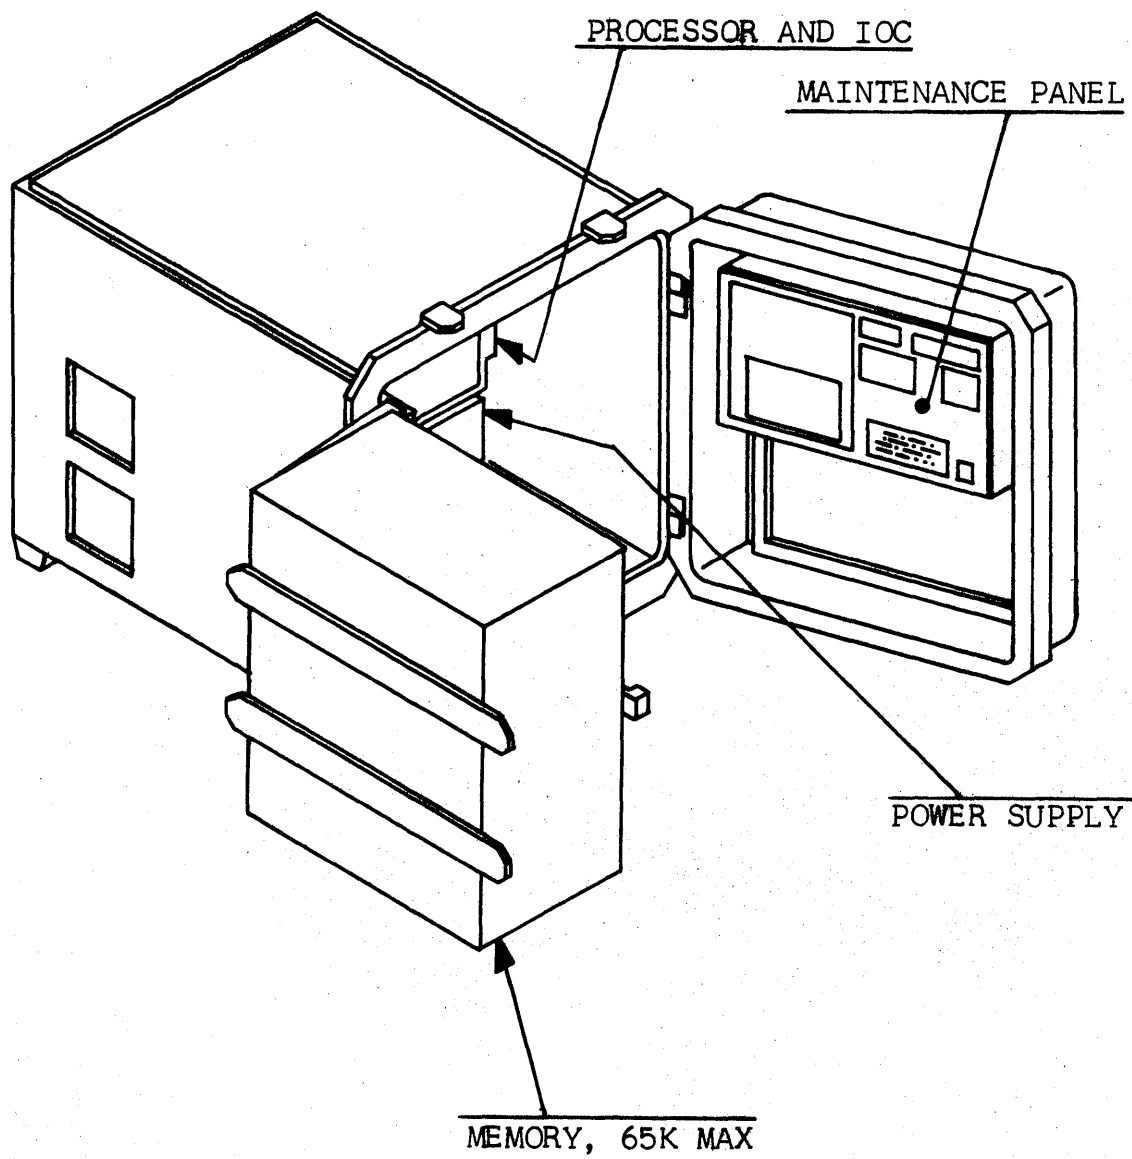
DPS MECHANICAL CONFIGURATION
